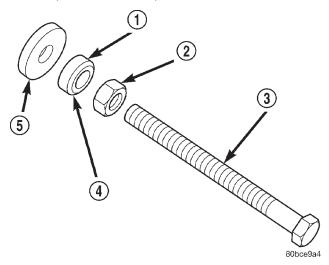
Proper Assembly Method for Special Tool 8512–A
